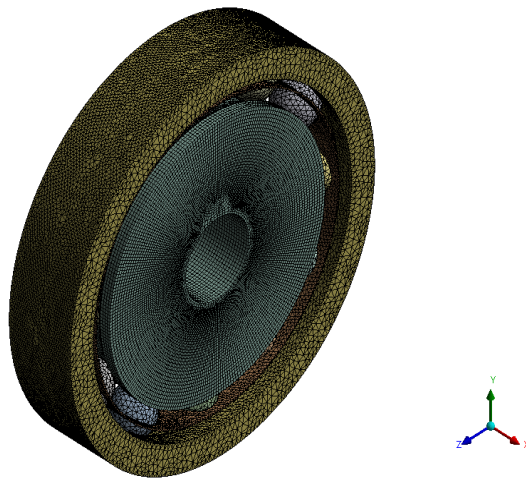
CAD model representation in three dimensions of a deep groove ball bearing
